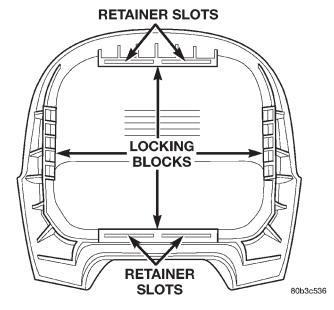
Driver Side Airbag Trim Cover Remove/Install INSTALLATION
